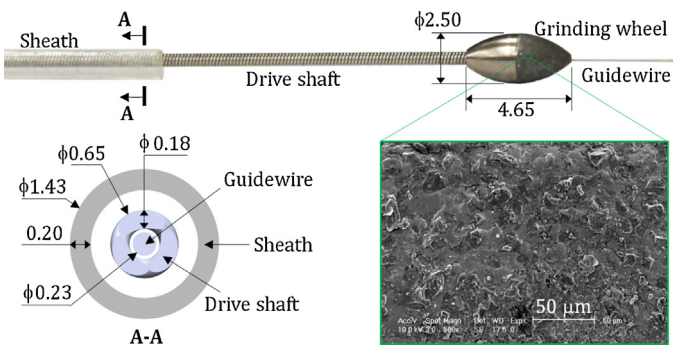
Catheter and grinding wheel dimensions, catheter cross-section, and SEM image of the metal bond diamond wheel surface (Unit: mm).
